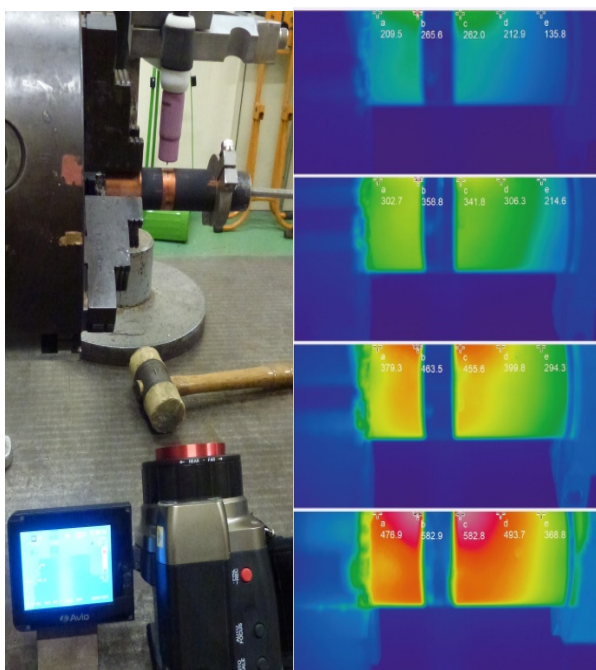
The radiation thermometer setup (left) and the thermographic image during welding. Images from the top, during preliminary heating, at the start of actual welding, at the first lap of actual welding, and at the end of the welding process.
